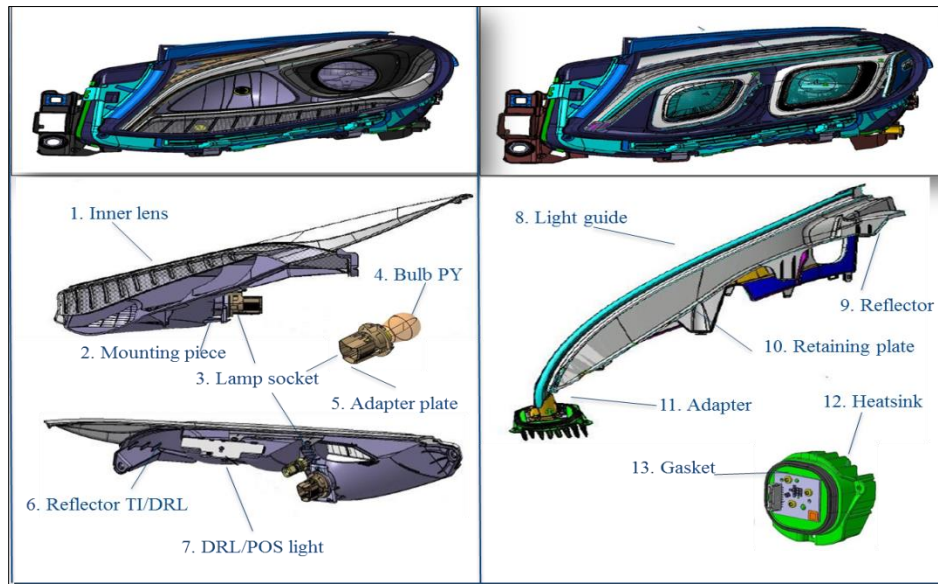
a) Reference vehicle selected equipped with the headlight module; b) innovative headlight module; c) standard drawing design and d) innovative drawing design.
